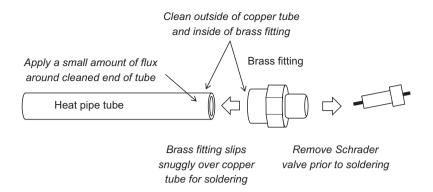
Brass fitting shown with Schrader valve removed and ready to assemble and solder.
